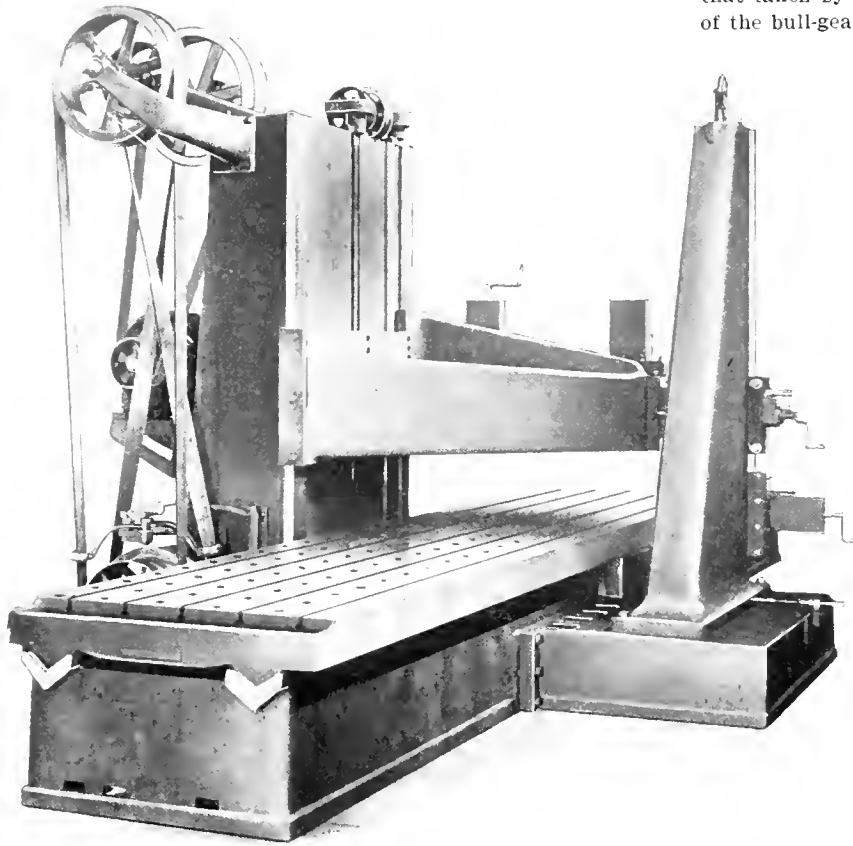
Cleveland Open-side Planer with Removable Column for Supporting a Fourth Head
